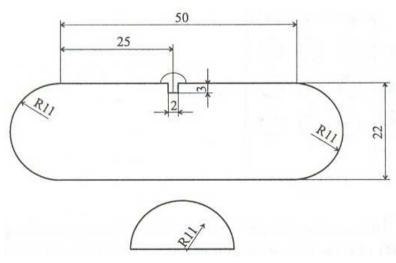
Top view (above) and cross section (bottom) of the electrodes used (all dimensions in mm)
